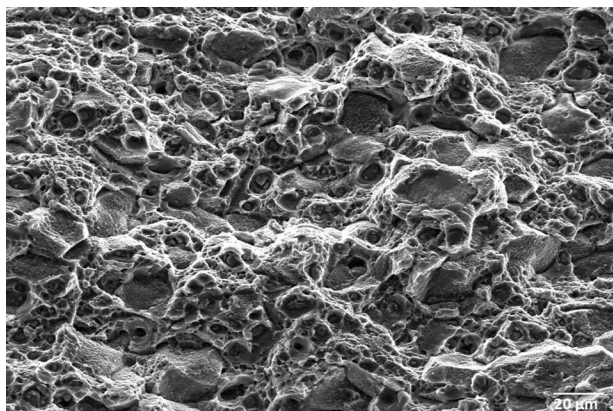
Higher magnified photograph of the fracture surface shown in Fig. 113. The specimen failed by tensile overload with the fracture surface indicating dimples throughout
